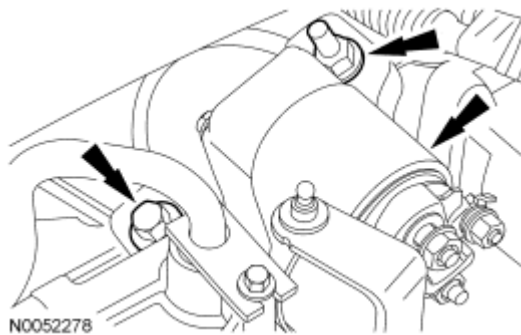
Identifying Bolt, Stud Bolt & Starter
